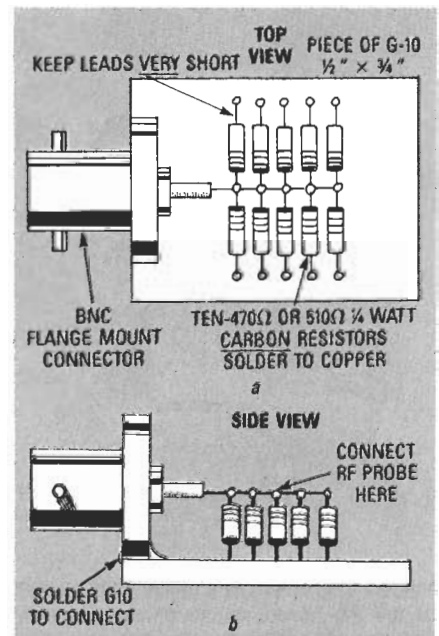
A DUMMY LOAD SHOULD BE USED while adjusting the power output.
